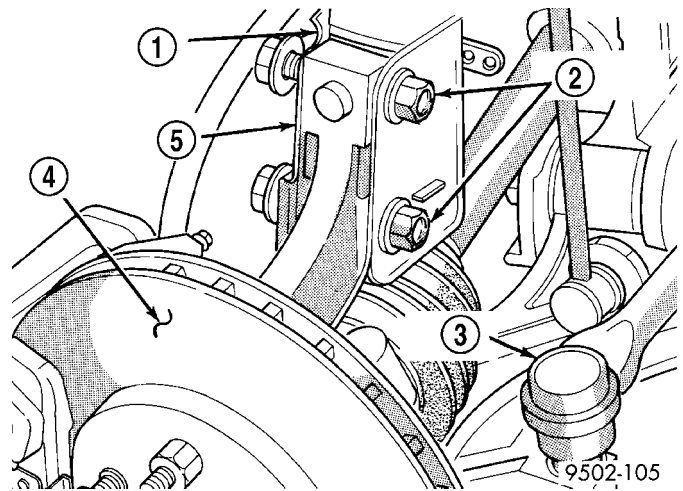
Clevis Bracket To Steering Knuckle Attaching Bolts
